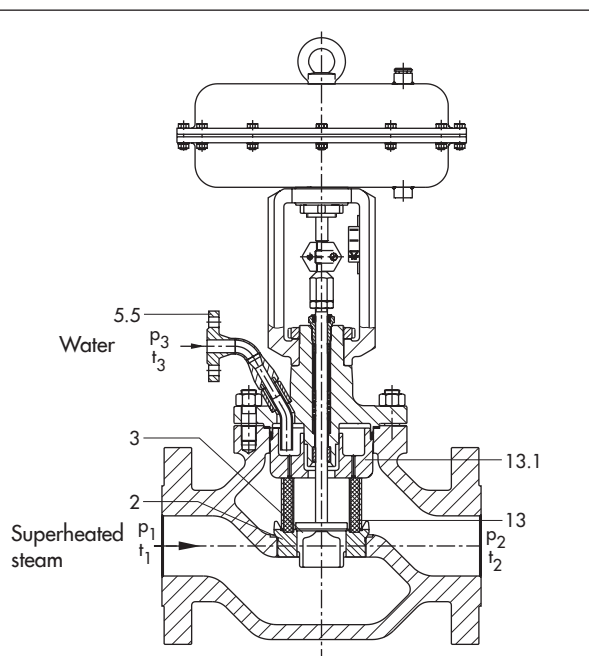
Type 3281-1 Pneumatic Steam Converter with flanged connections and Type 3271 Actuator
